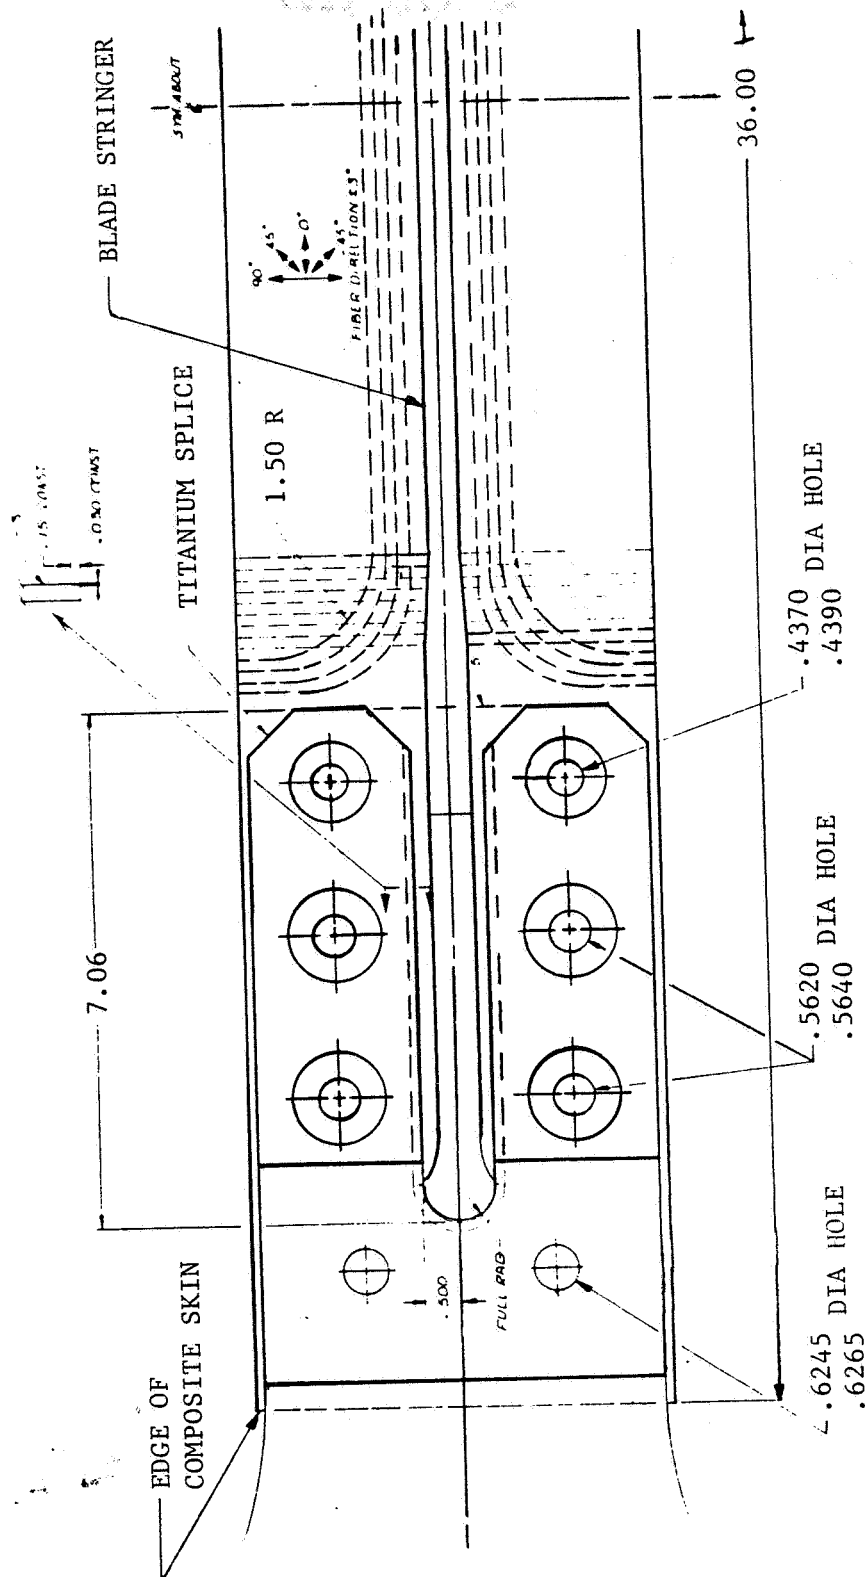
STRINGER TRANSITION JOINT - PLAN VIEW
